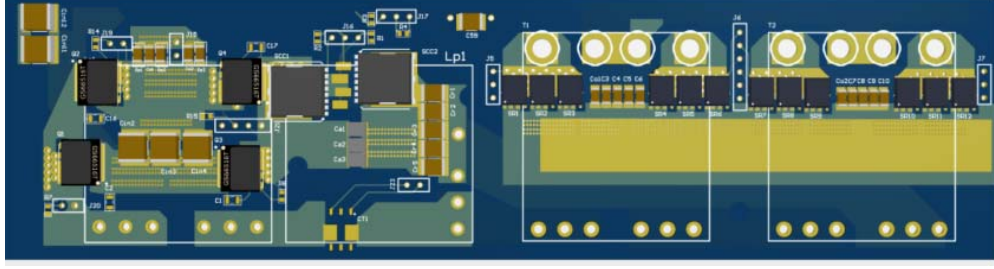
Top view of IMLC bottommost PCB layer with high loss components.
